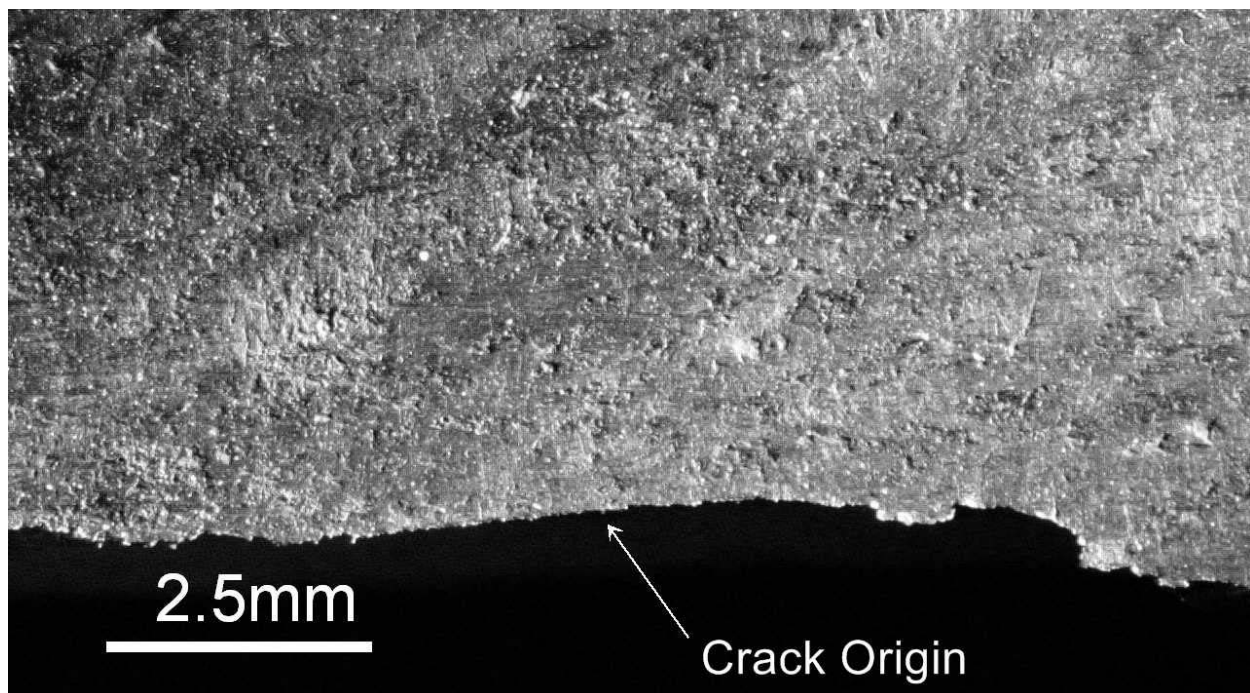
Shank Surface View of Crack 2 Origin (PT0099)
